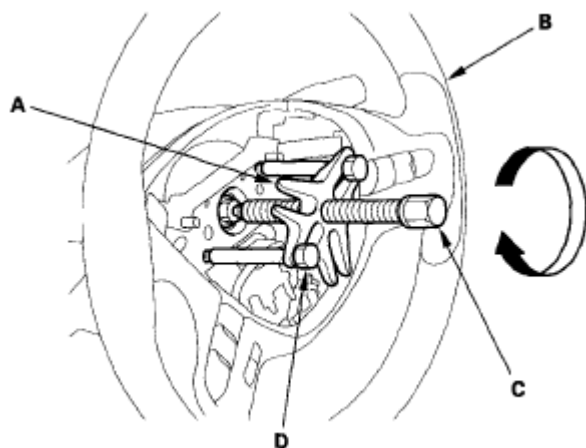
Identifying Steering Wheel Puller On Steering Wheel & Bolts
